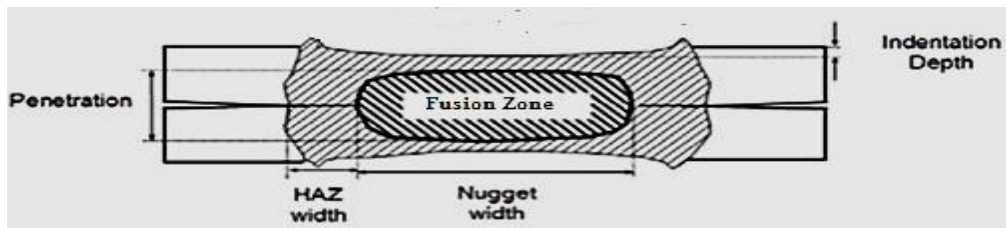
Geometric Attributes of the Spot Weld [15]
